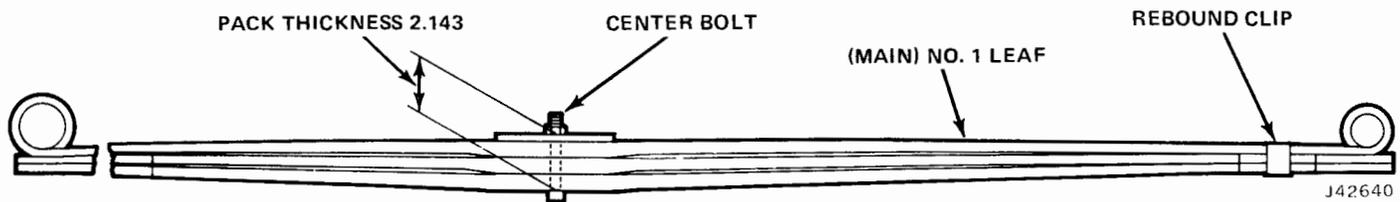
Rear Tapered Leaf Spring—Typical
